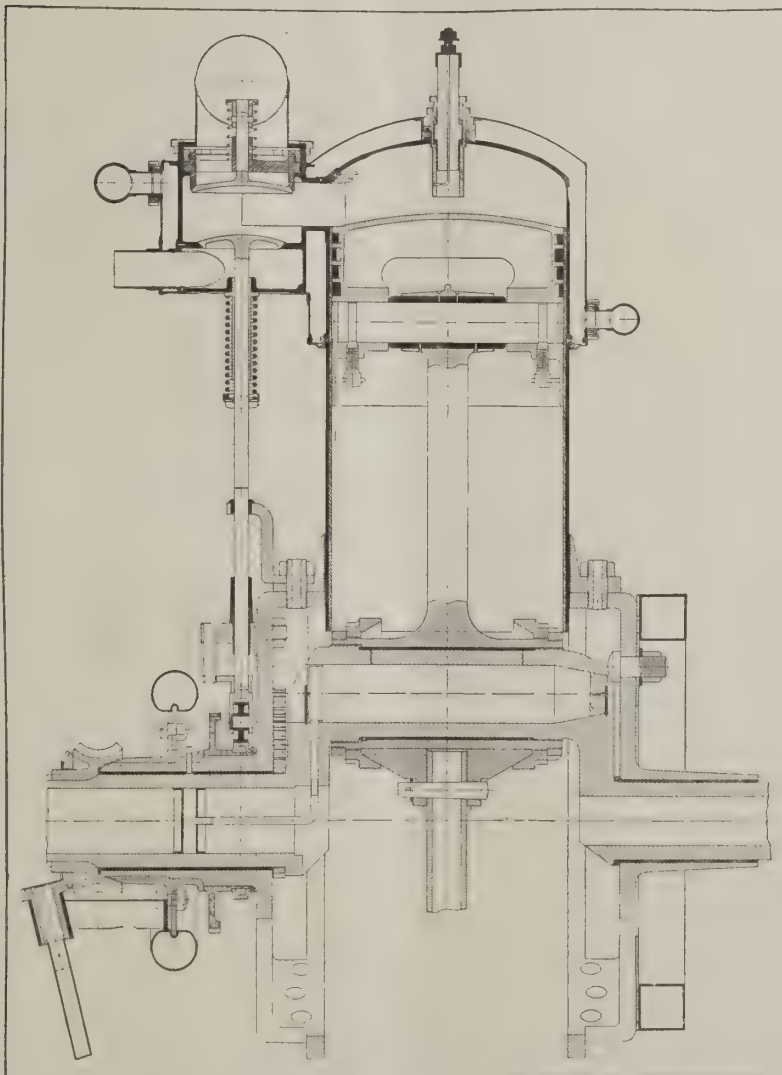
The 5-Cylinder, Water-Cooled, Radial Manly Engine, Built in 1901
